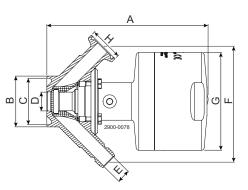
Pneumatic with valve body: Collared pipe welding
